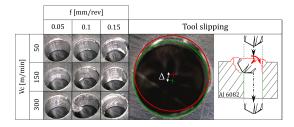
Surface defects on Aluminium 6082 plates (HoLEX tool)
